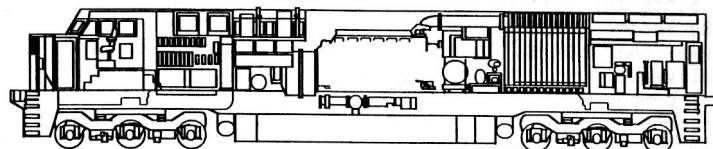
Concept Design of Coal Fueled Diesel Locomotive
